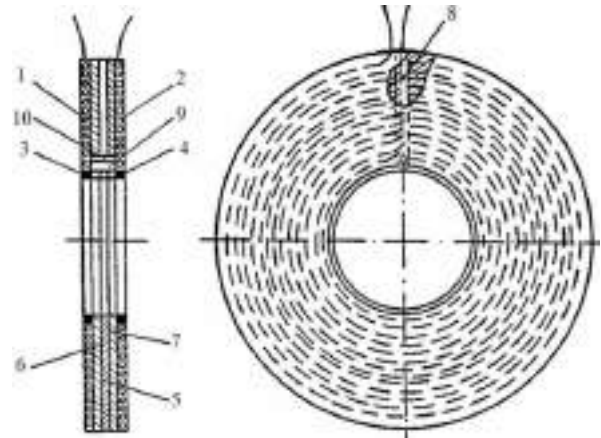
Stator winding module of a low-speed cylindrical LIM
